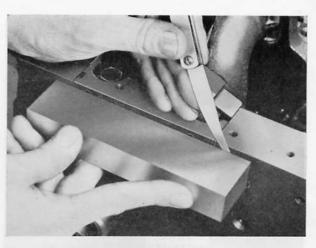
Checking the front main bearing cap for alignment with the face of the crankcase
